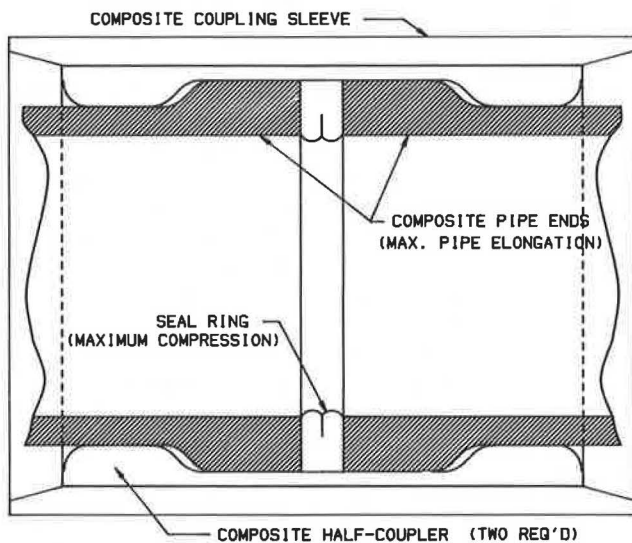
Section view showing how coupled pipe thermal expansion can be accommodated by composite coupler assembly.
